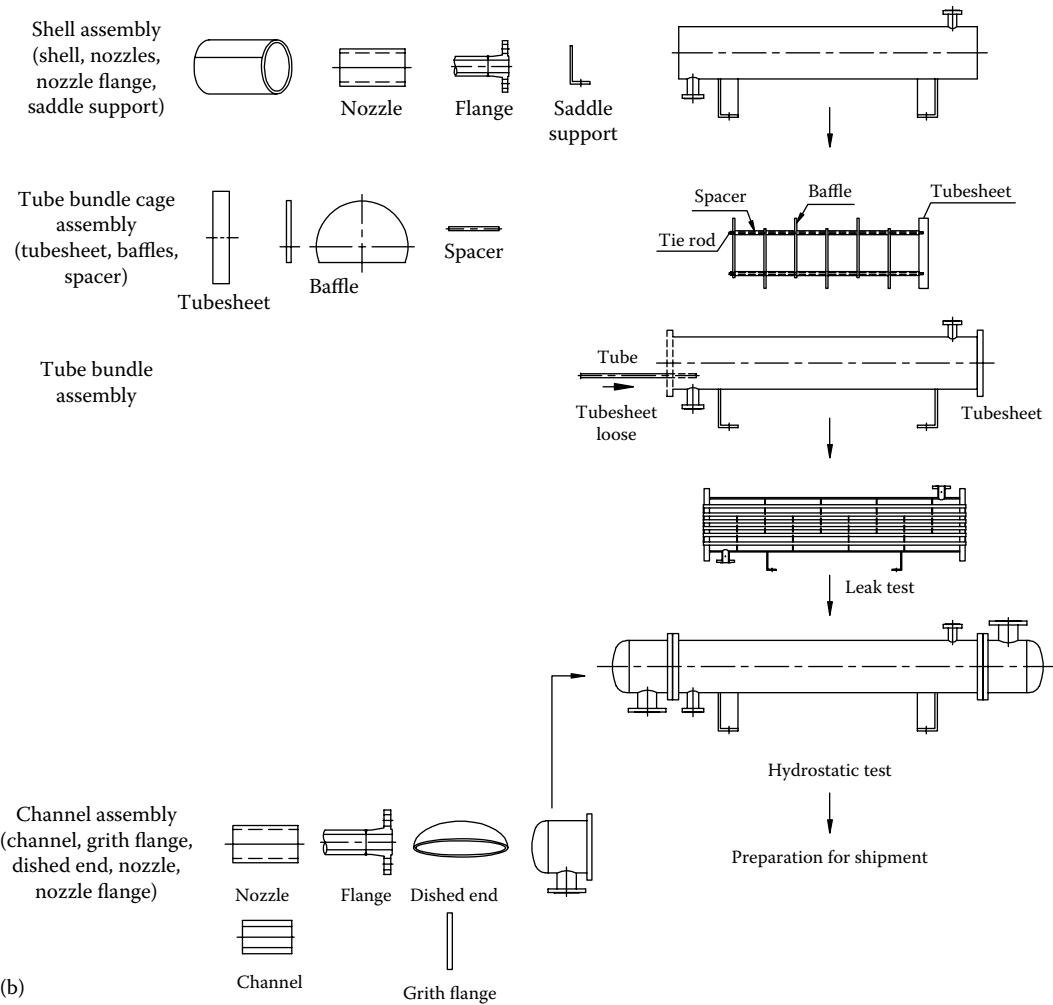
(continued) Manufacture of fixed tubesheet shell and tube heat exchanger. (b) assembly sequence
